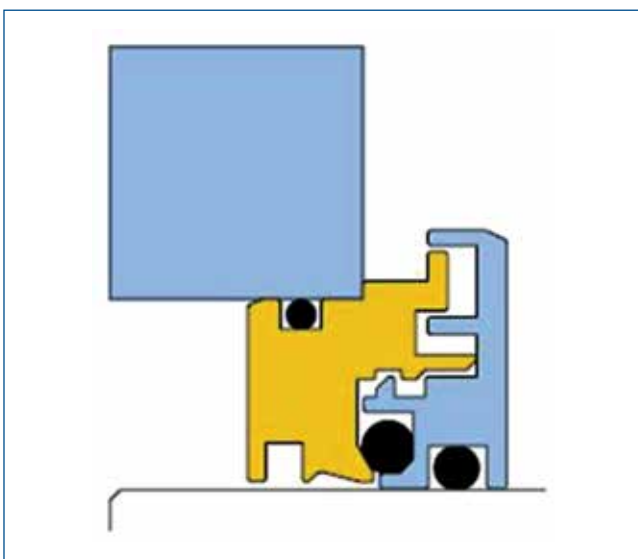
Bearing protector seal with moving/sealing O-ring contacting smooth surfaces only.
